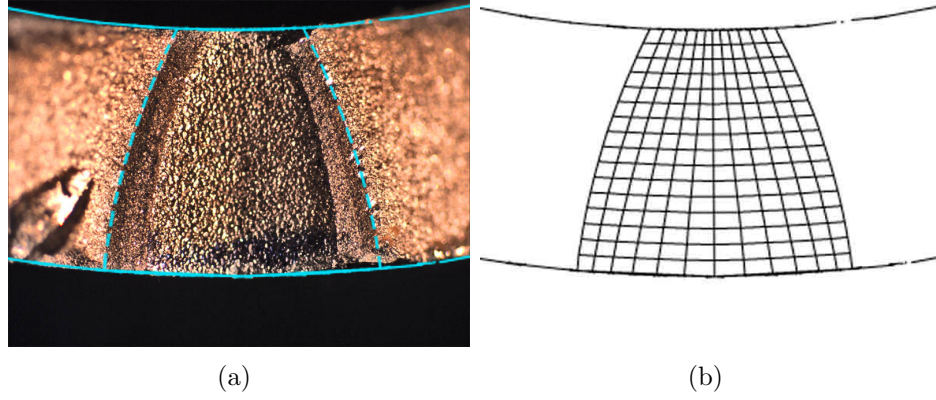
(a) Fractograph with BEM geometry superimposed and (b) BEM mesh of pre-crack for specimen N12.
